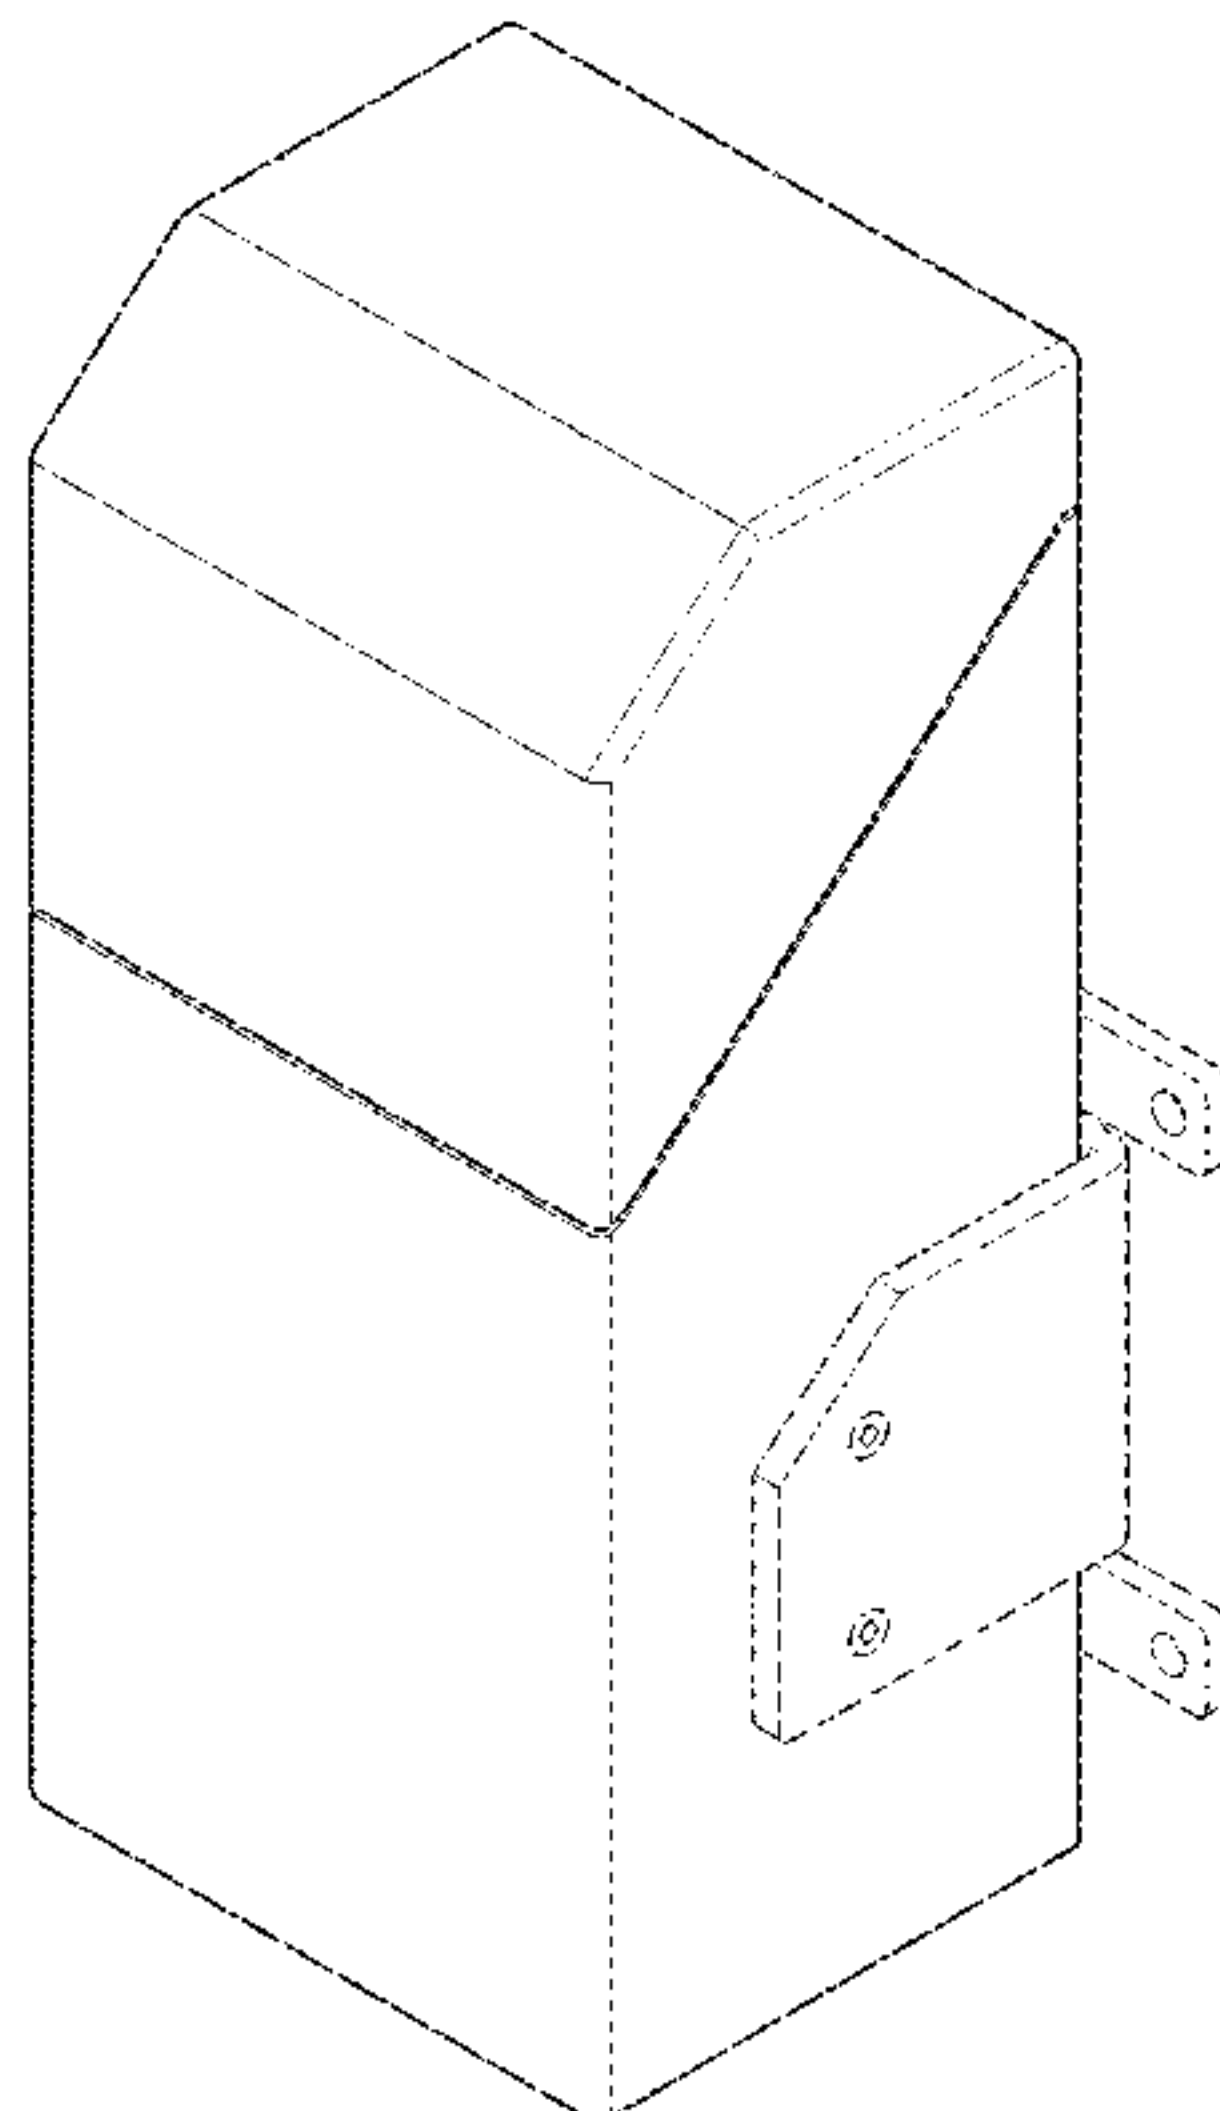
is a bottom right side perspective view of the sensor of FIG. 14.
